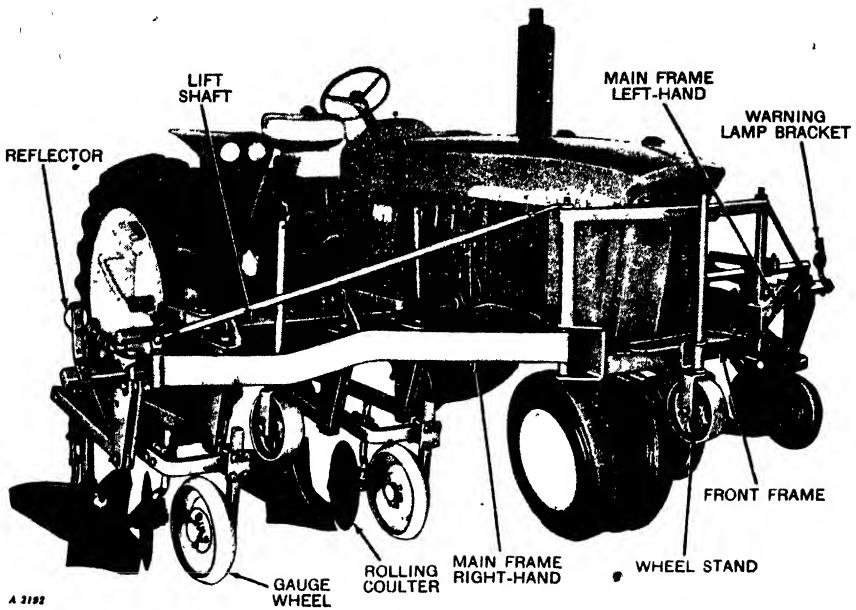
Integral-front-mounted five-bottom bedder with rolling colters. Figure 10-19 shows the rear bottom. (Deere & Co.)
